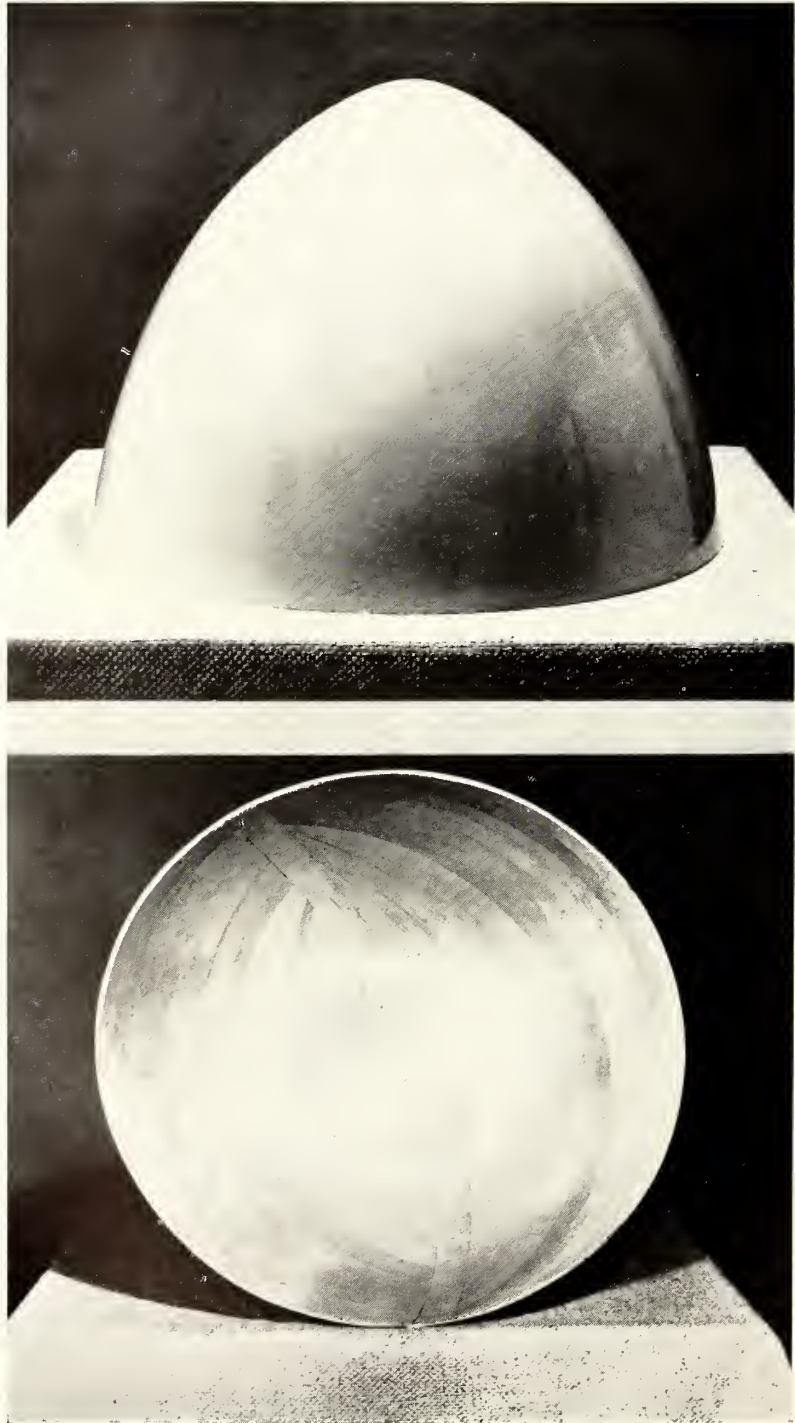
Typical airplane spinner of molded plywood. (*Above*) Exterior view; (*below*) interior view showing tailoring of strips.
